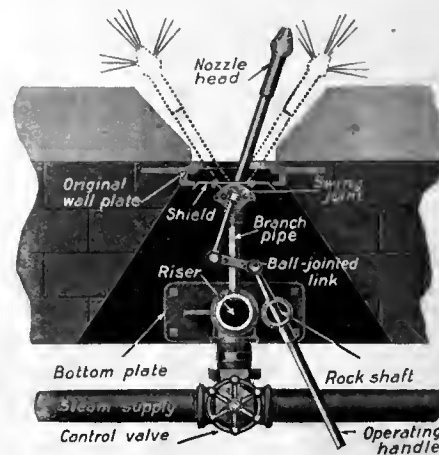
MECHANISM FOR OSCILLATING BLOWER NOZZLES.
